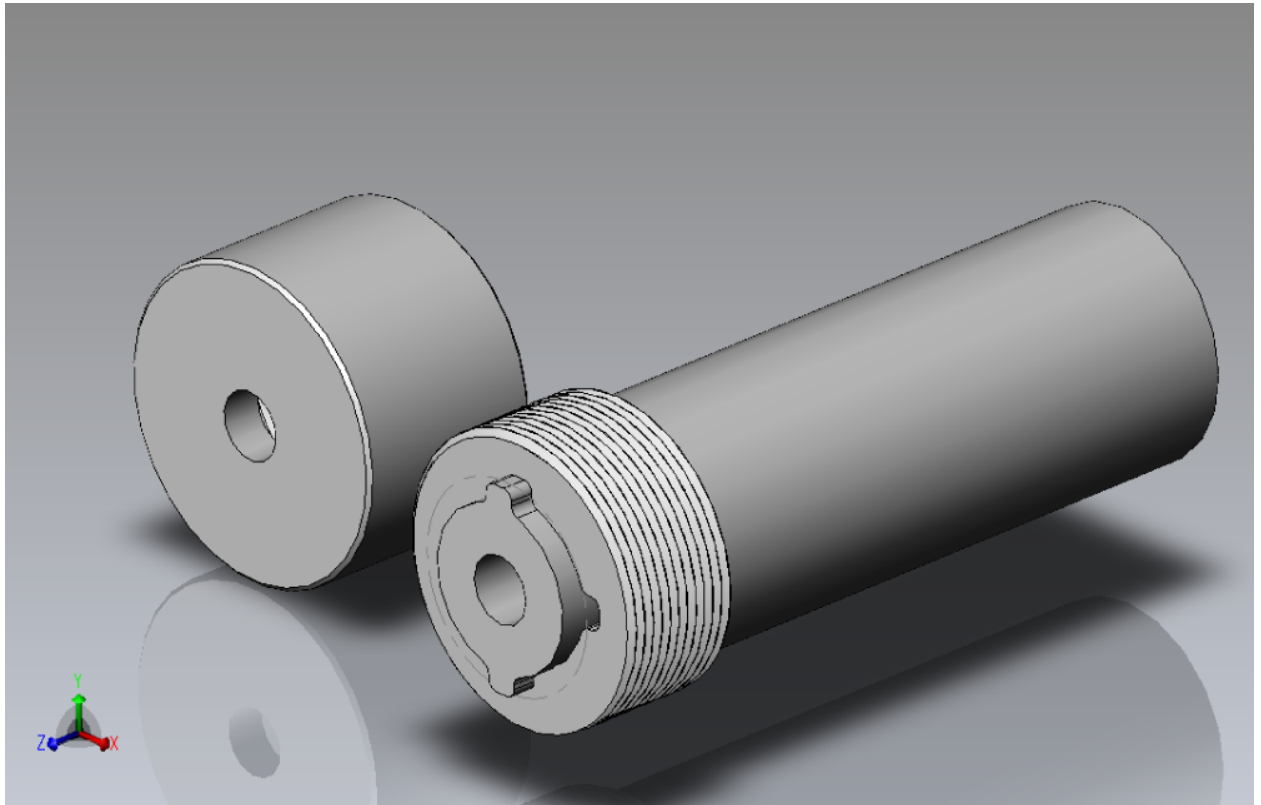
3D view of screw cap (left) and the inner electrode body piece mounted inside the outer electrode body piece (right). The two lugs of the inner electrode body piece fit into the locking slots of the outer body piece. When the cap is screwed onto the outer body piece, it exerts pressure onto the inner body piece, pushing it onto the sensing membrane (located between the inner and outer body pieces) without causing any rotating motion of the membrane. This ensures a tight and smooth mechanical seal of the membrane.
